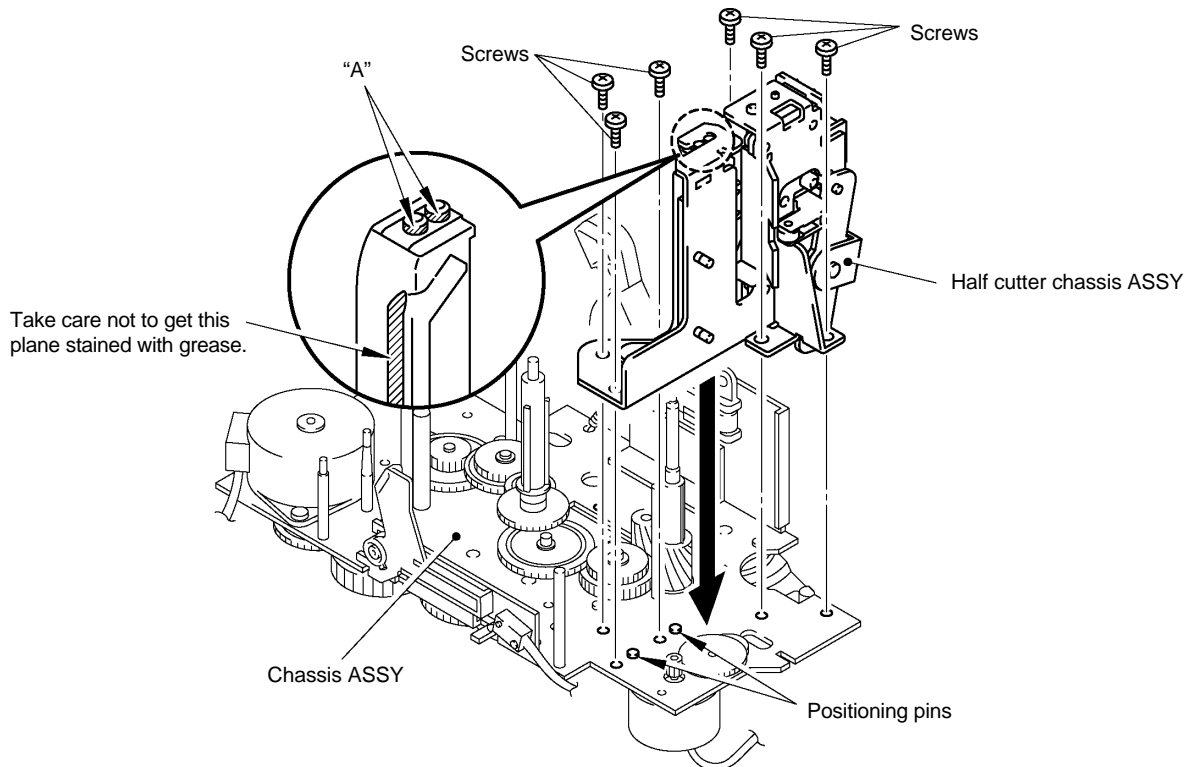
Reassembling the Half Cutter Chassis ASSY (2)
